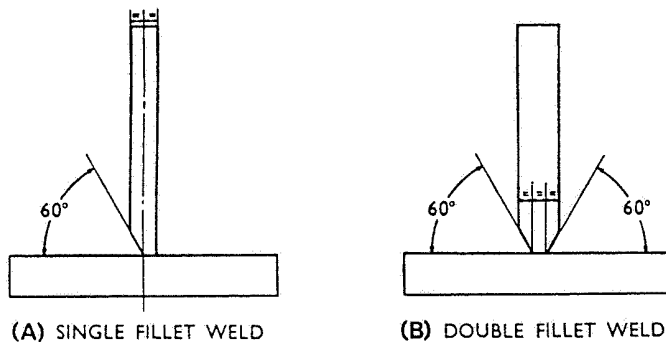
PREPARATION FOR FILLET WELDS
